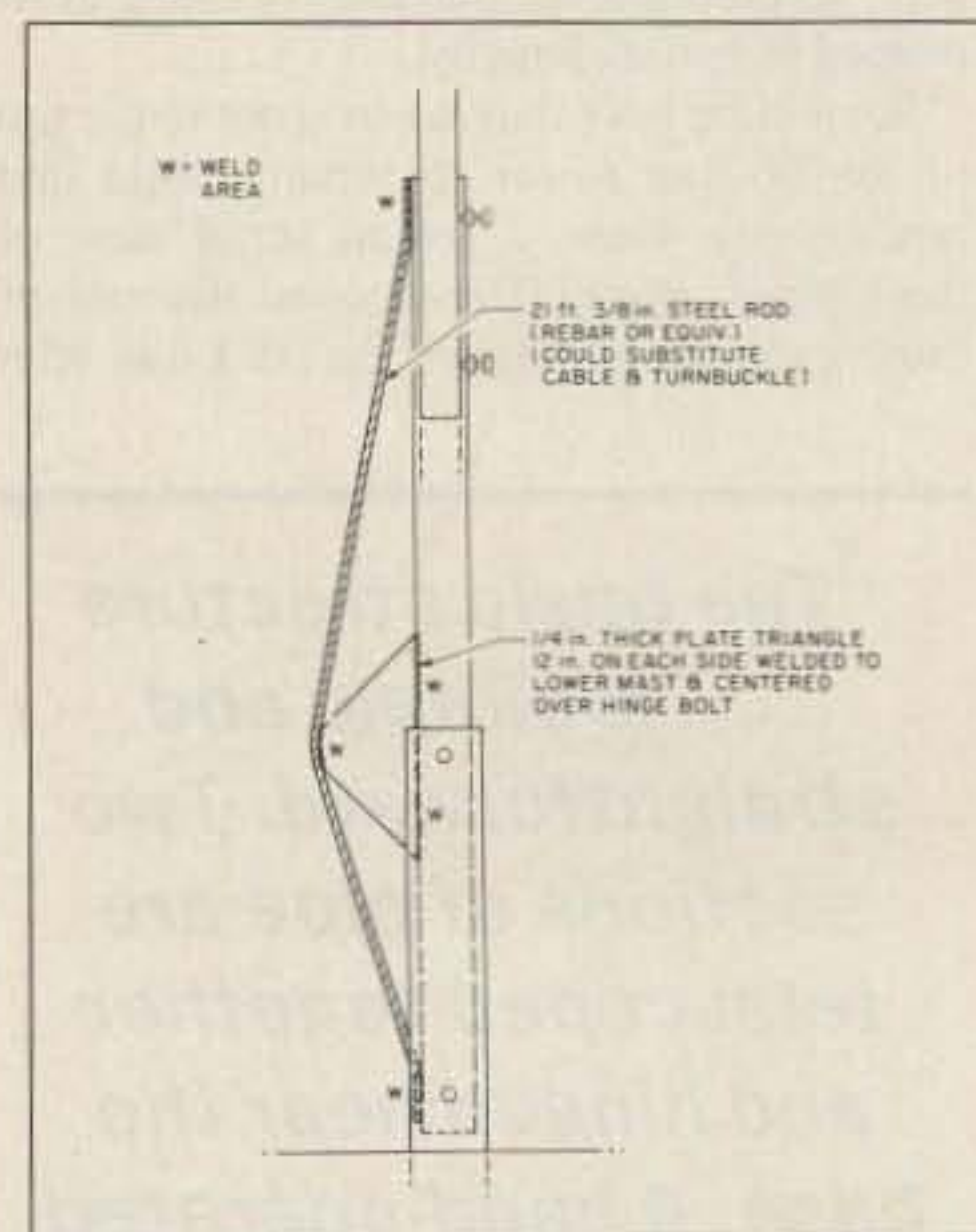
Truss for lower mast section. Use this when adding another section to the tower.
